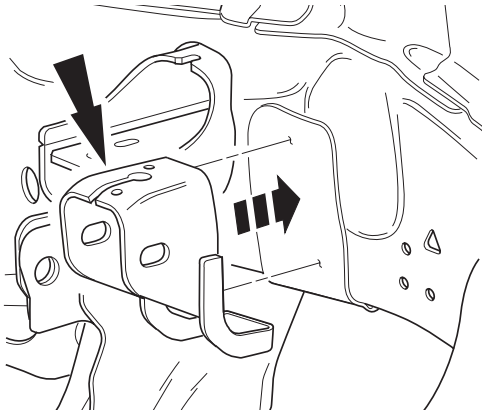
VIEW OF DIFFERENTIAL BRACKET AND REINFORCEMENT BEING POSITIONED ON THE REINFORCEMENT
